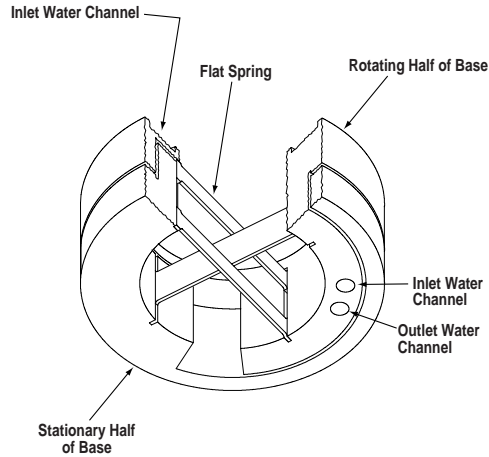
Details of the rotating base of the rotating mirror assembly.
